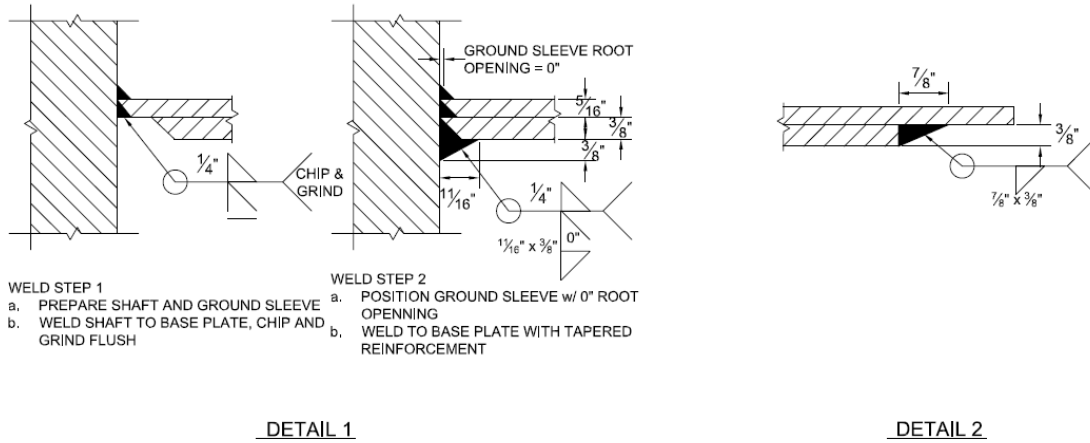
Weld details for 33-3-12-TXEC-SG-SA, as called out in Figure 5-14
